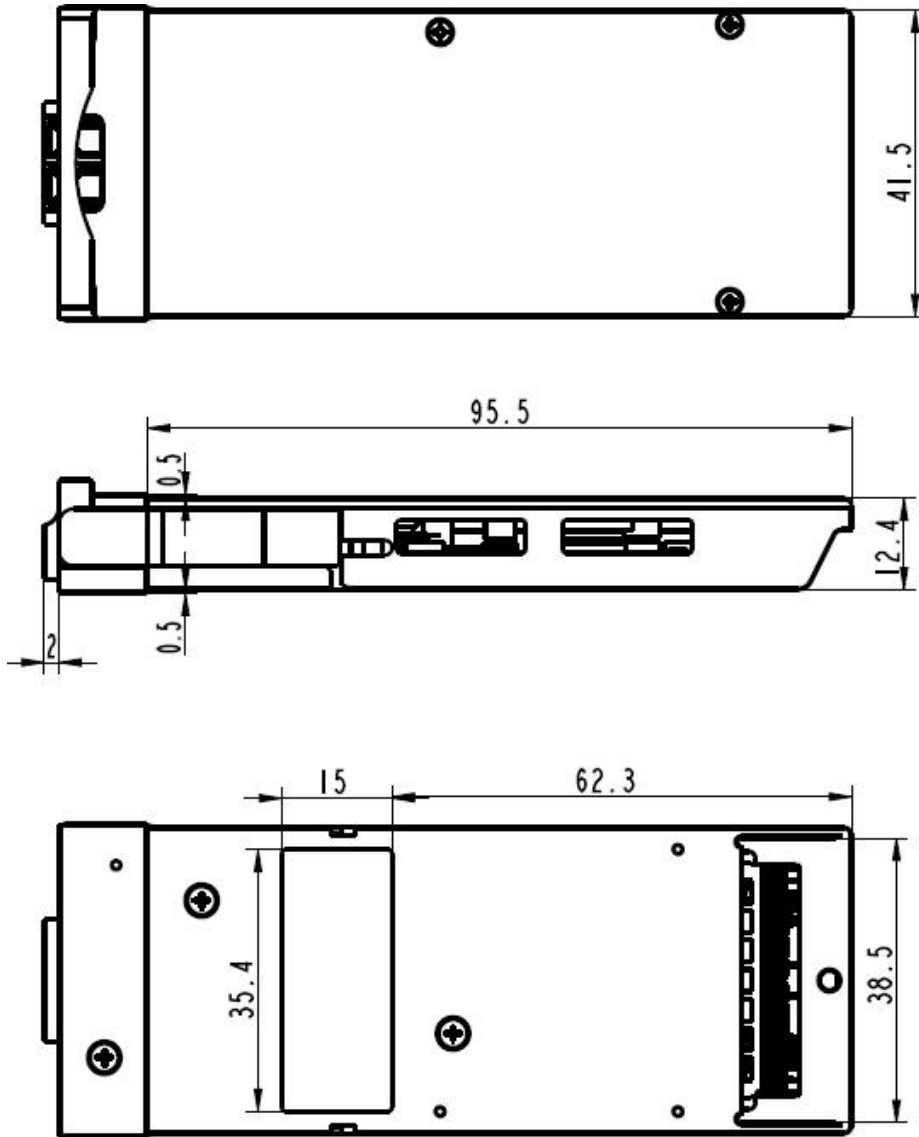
Mechanical Dimensions of the CFP2 Optical Module
